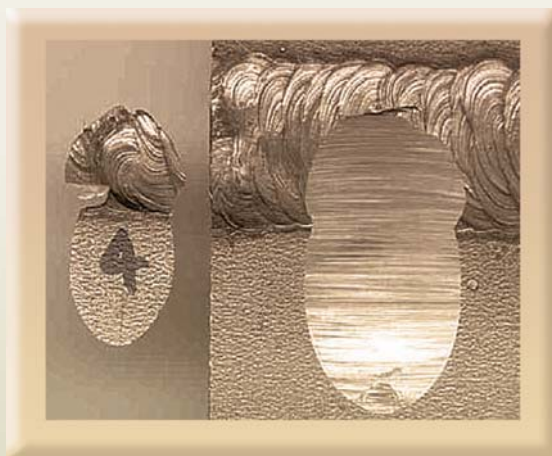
Sample from HAZ of welded SS plate
